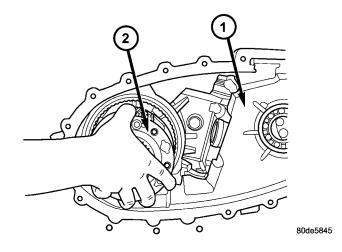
Remove Input Planetary Assembly 1 - FRONT CASE 2 - INPUT PLANETARY ASSEMBLY
